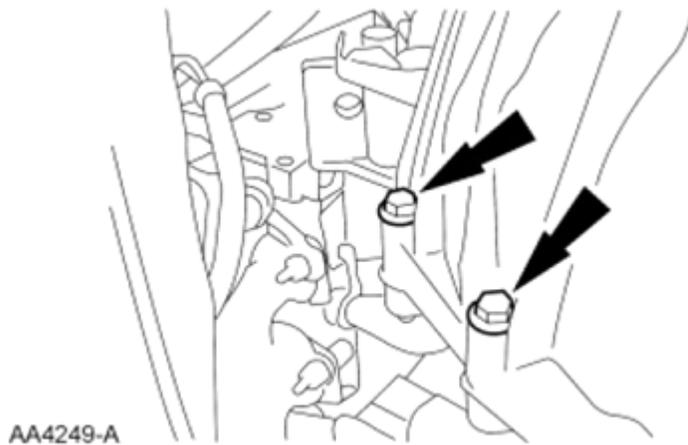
Locating Lower Transmission-To-Engine Bolts
